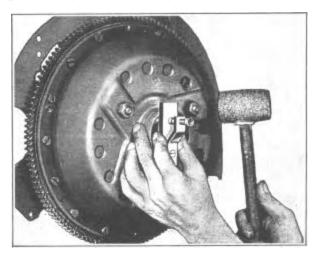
Aligning Clutch Fingers—J-774 Clutch Finger Adjusting Gauge
